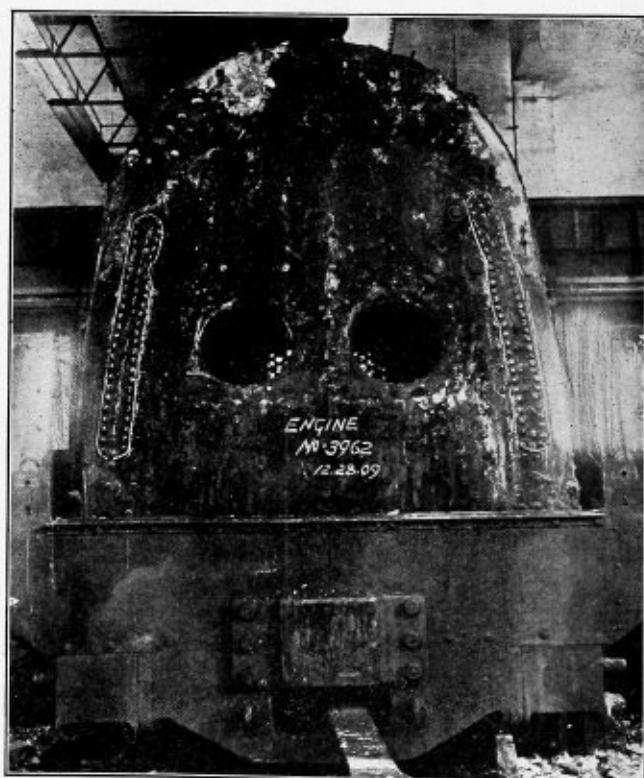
FAILURE OF BACK-HEAD ALONG THE OUTER ROW OF STAYBOLT HOLES, A COMMON FAILURE WITH RIGID STAYBOLT SETTING.
